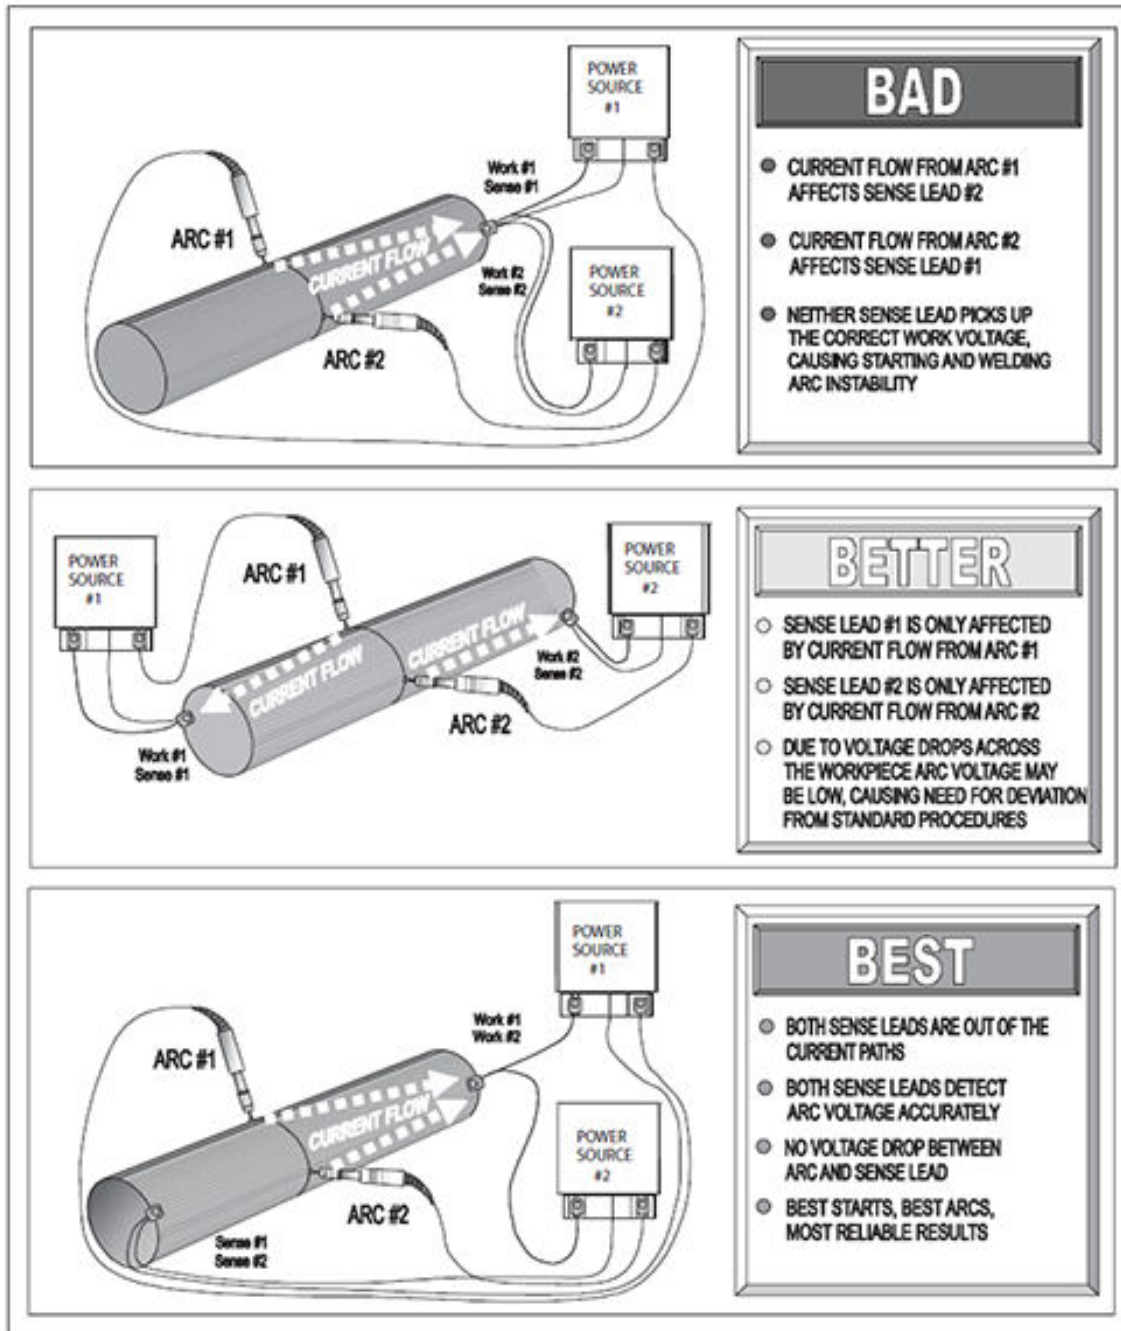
MULTI-ARC LONGITUDINAL WELDS
